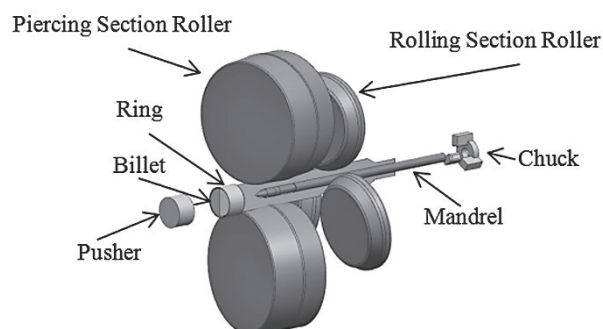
Technical principle diagram of the integrated forming of shape and inner hole of hollow axle
